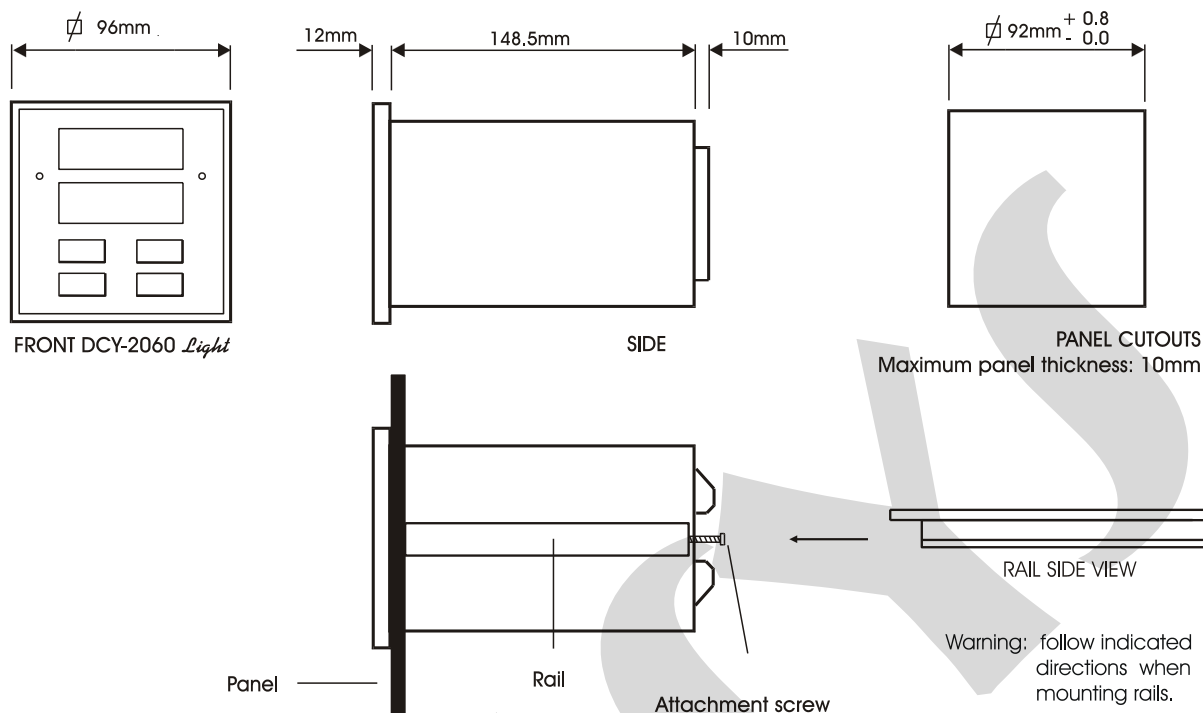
Dimensional drawing, panel mounting cutout and side view for DCY-2060 *Light* controllers
